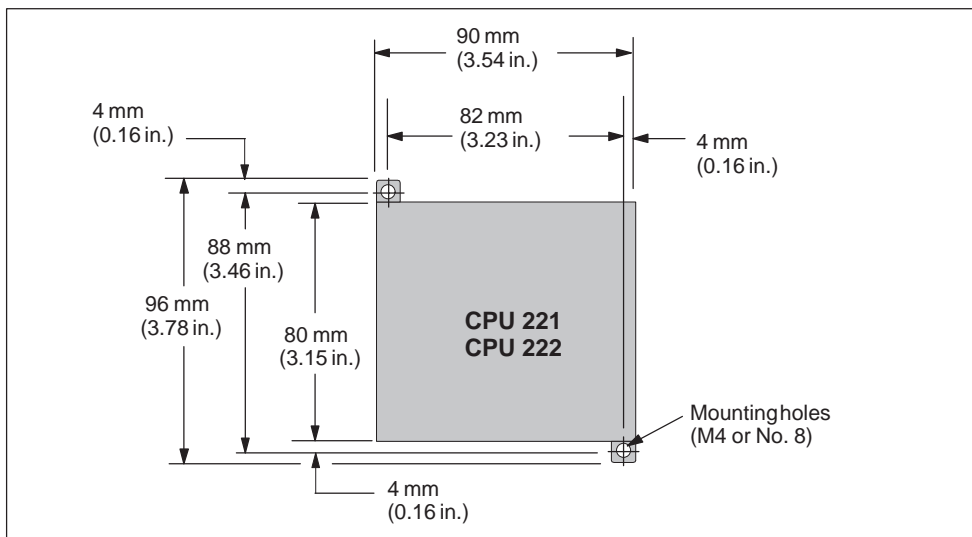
Mounting Dimensions for CPU 221 and CPU 222
